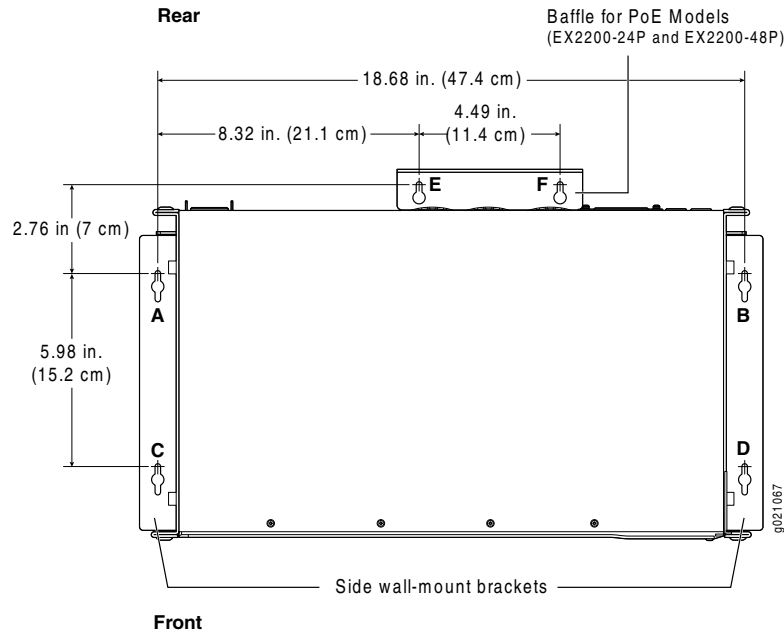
Attaching Wall-Mount Brackets to a Switch Chassis
